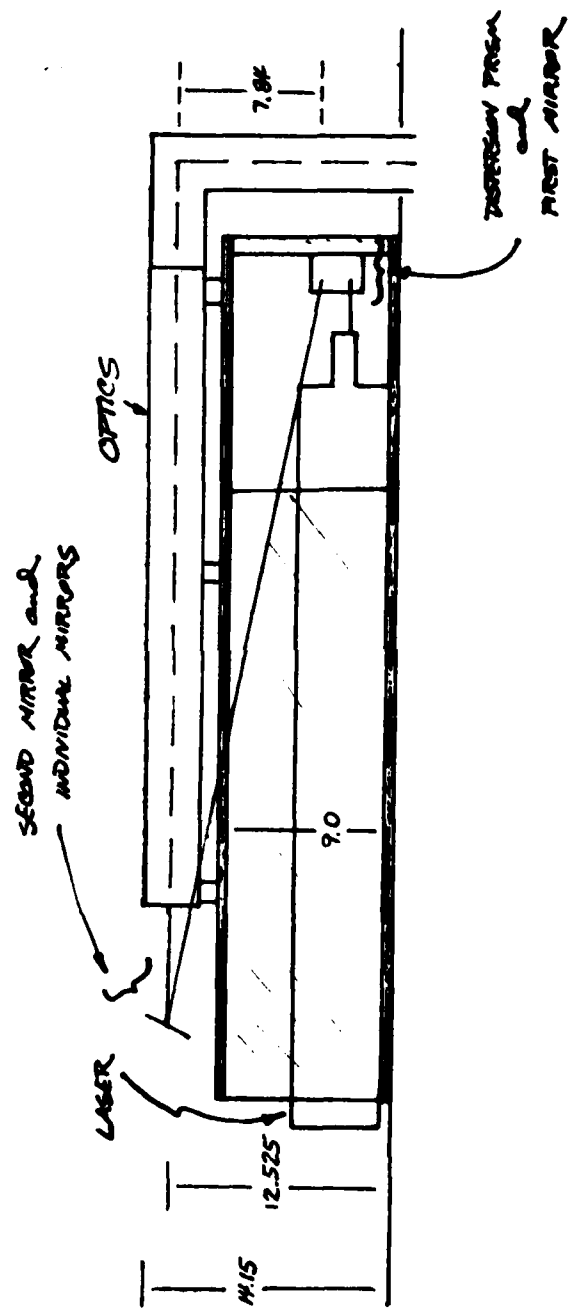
FINAL PROPOSED LAYOUT, SIDE VIEW
